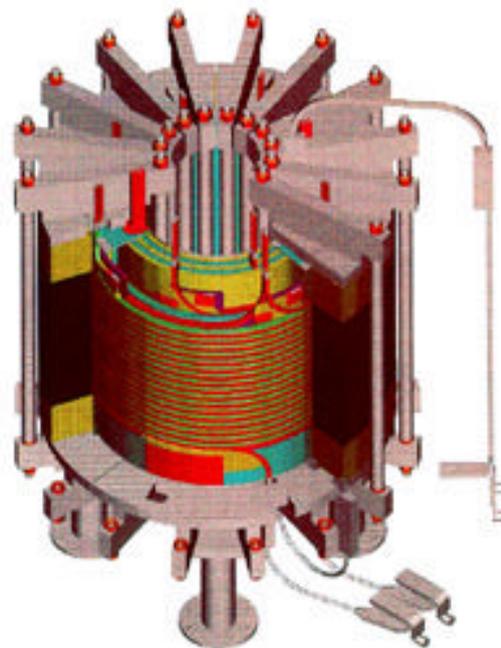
13T CSMC test coil and cutaway view of assembly.
